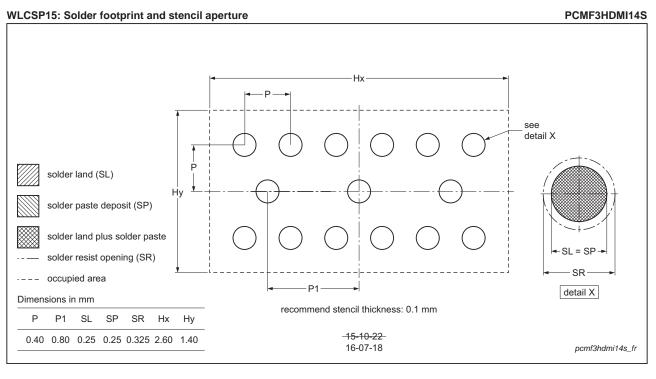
Soldering footprint WLCSP15 (PCMF3HDMI14S)
